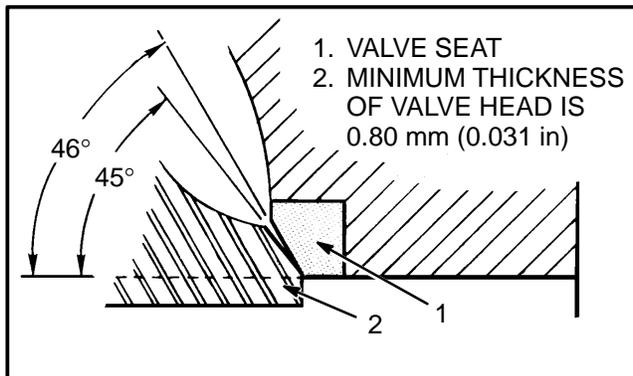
VALVE SEAT SPECIFICATIONS FOR INTAKE AND EXHAUST VALVES
